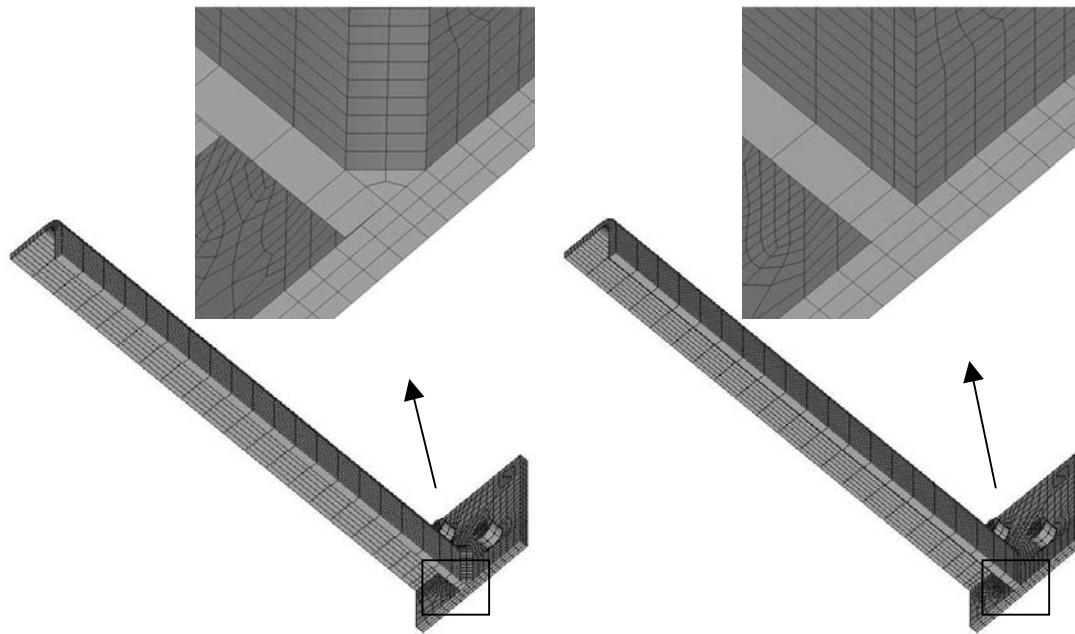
Model with fillet weld (gap between hollow section and flange-plate) and "butt" weld (direct connection of hollow section and flange-plate)
